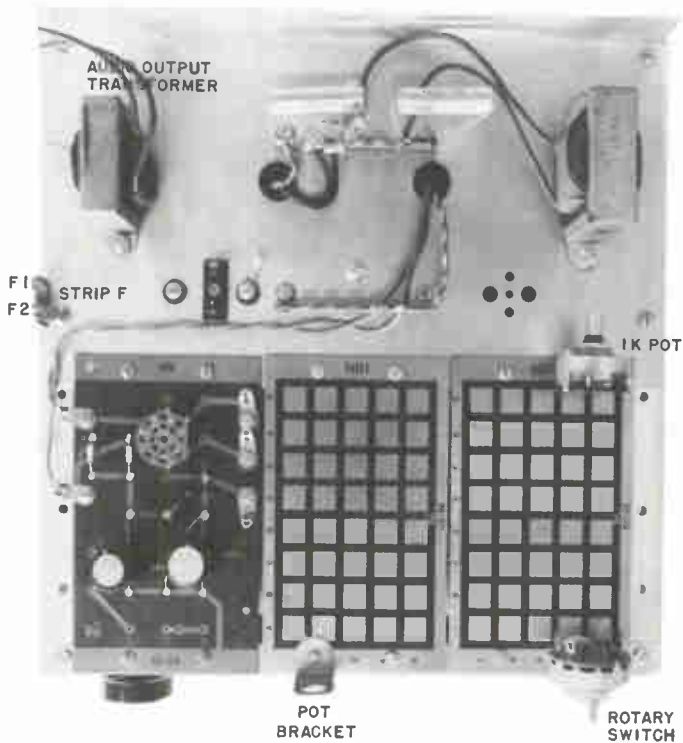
Refer to this diagram as you install the parts on the chassis.
